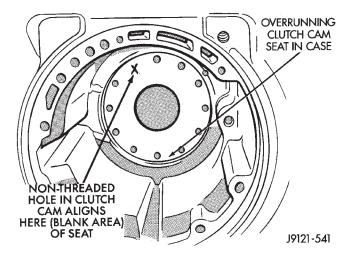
Location Of Blank Area In Clutch Cam Bolt Circle
